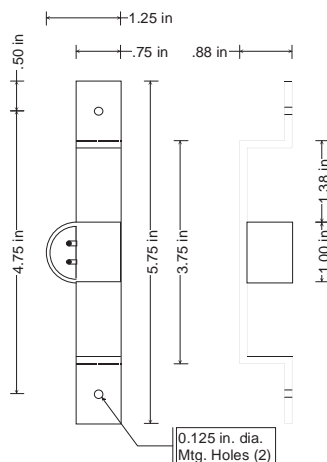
STx104-U Unit Ventilator Sensor Probe Mechanical Dimensions
